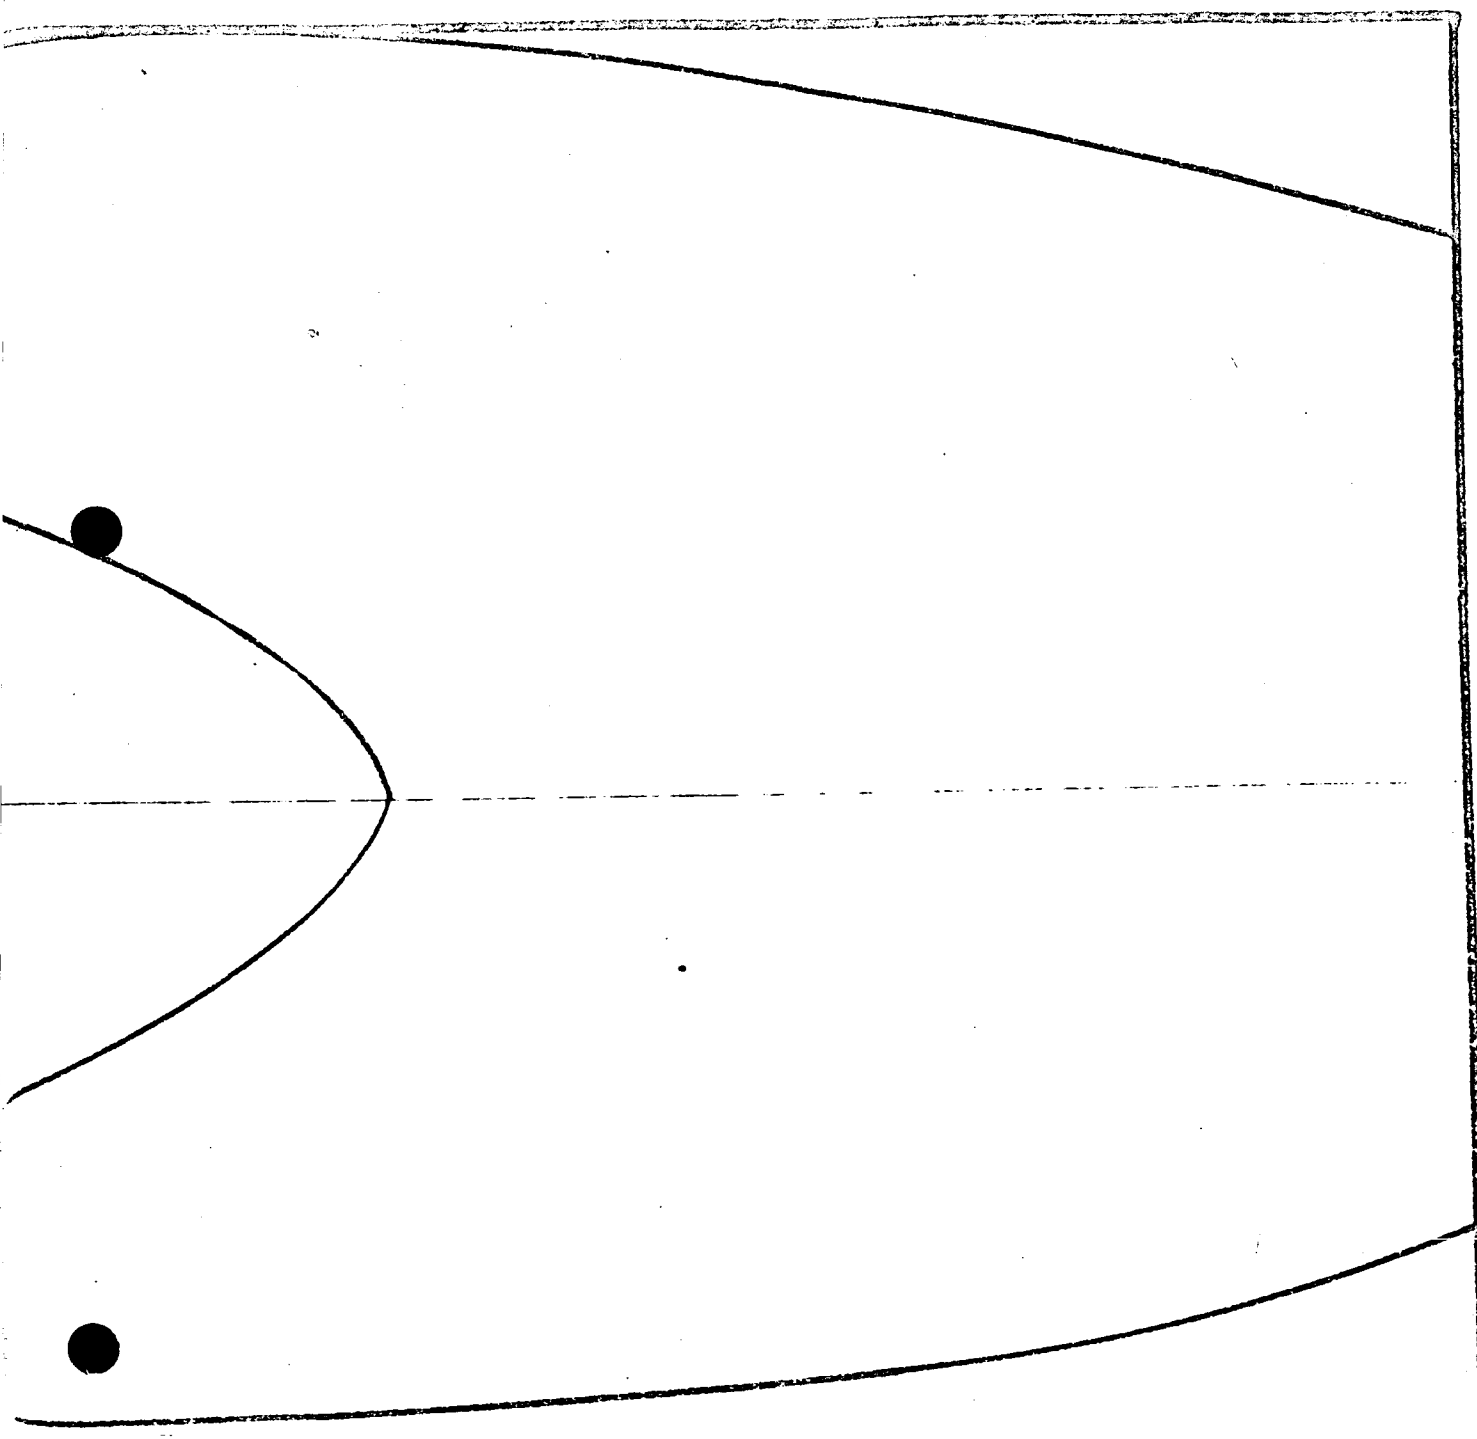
THERMAL PATTERN FOR WELD PANE
